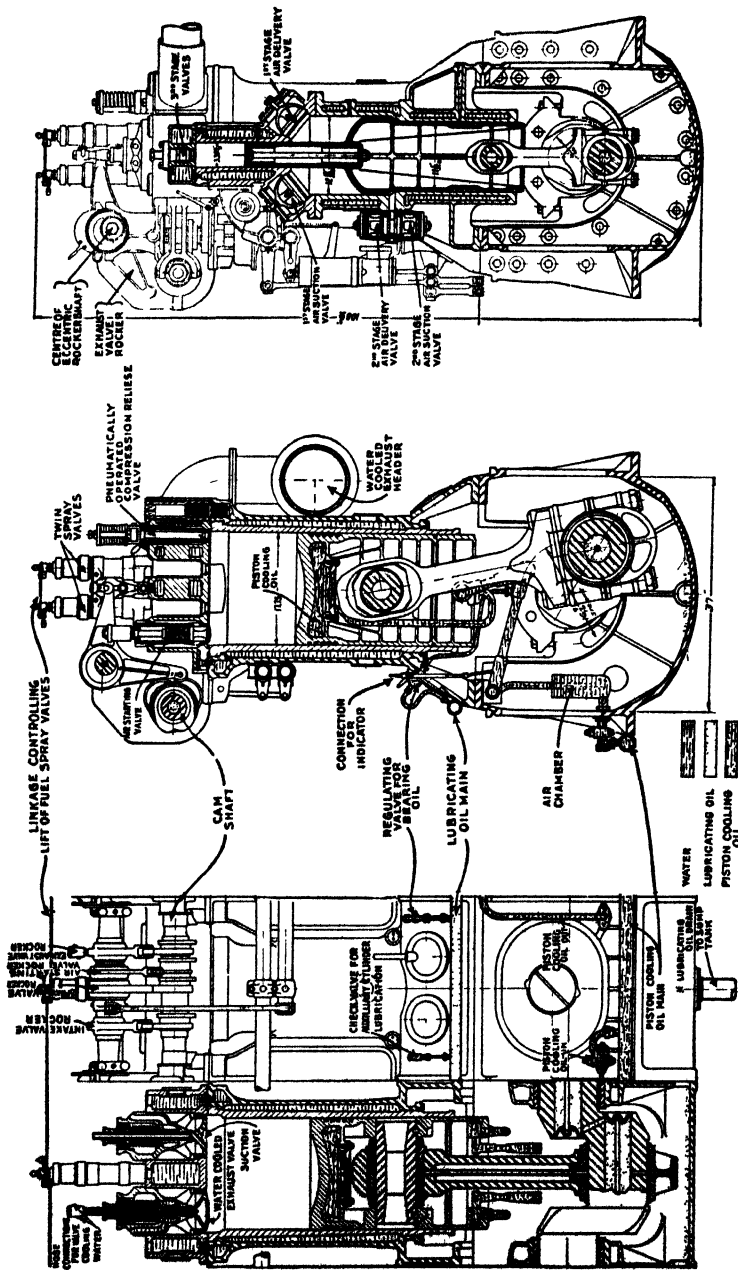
Longitudinal Section and Elevation Through Two Main Cylinders
